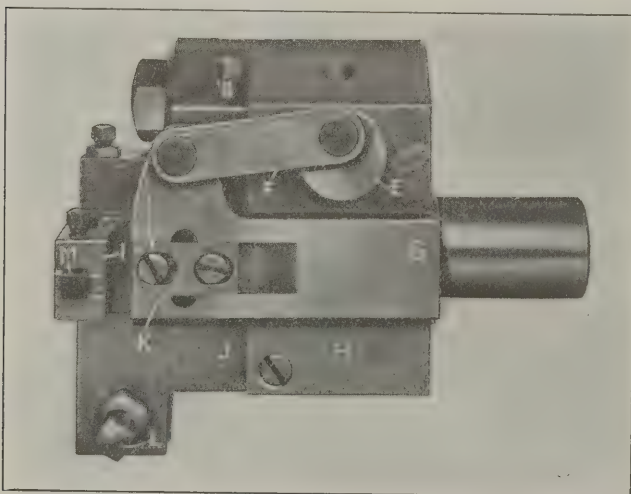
Rear View of Oil Groove Cutting Tool showing Crank-Tool-slide, etc.
